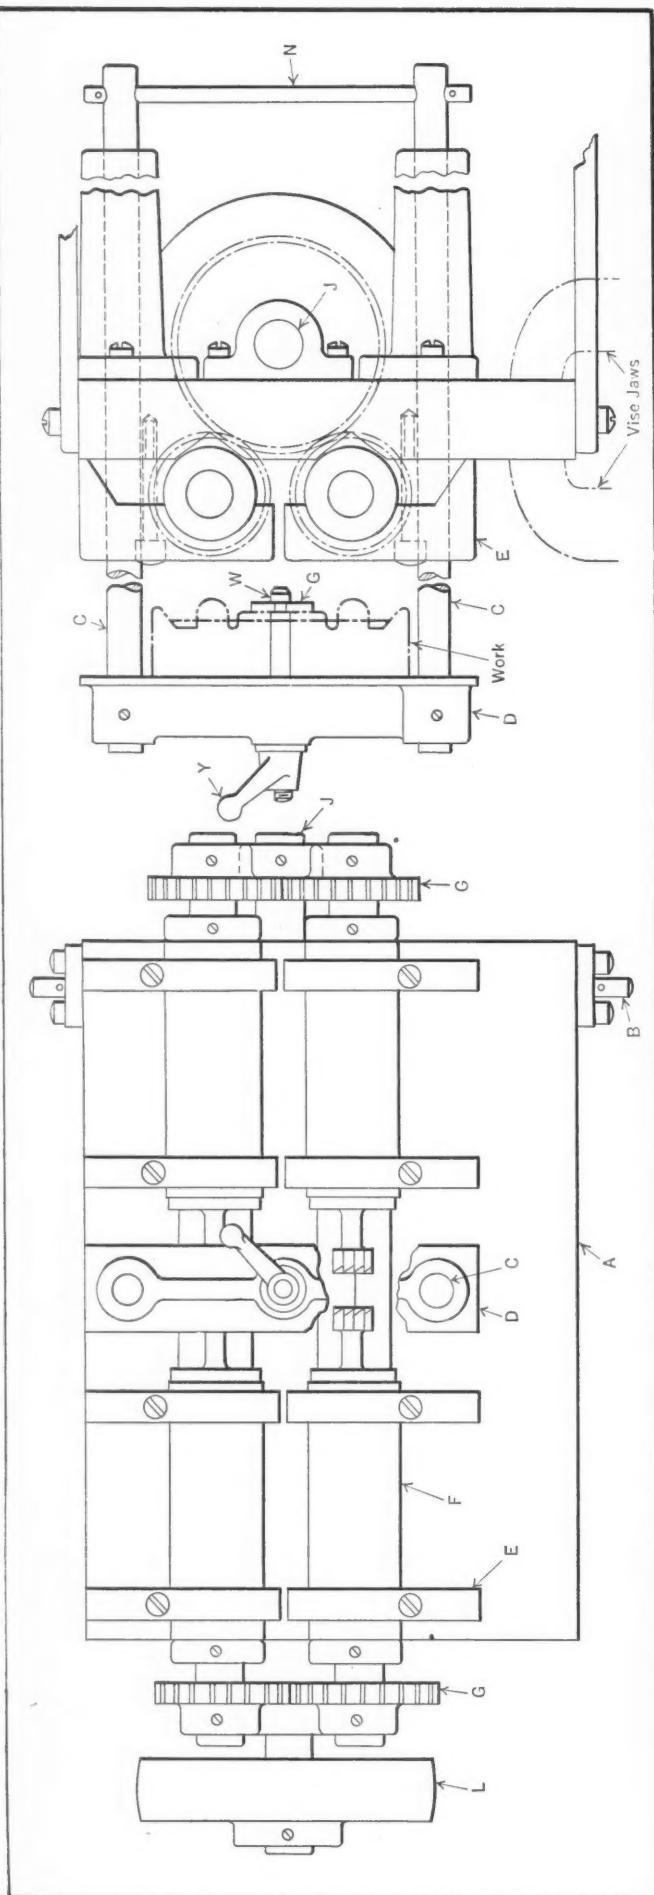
Power-driven Fixture for Milling the Part Shown in Fig. 1
